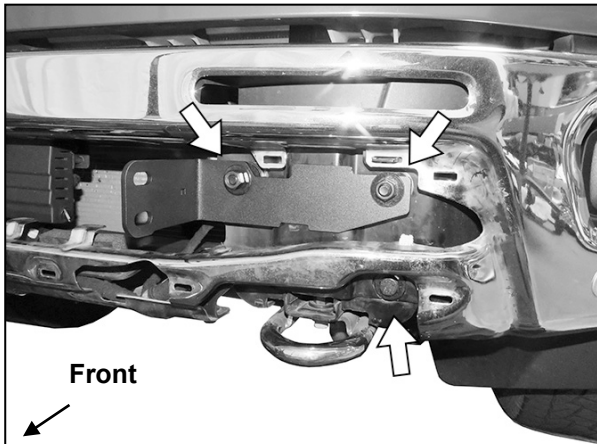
Attach driver/left Frame Bracket to Spacers and Double Bolt Plate
